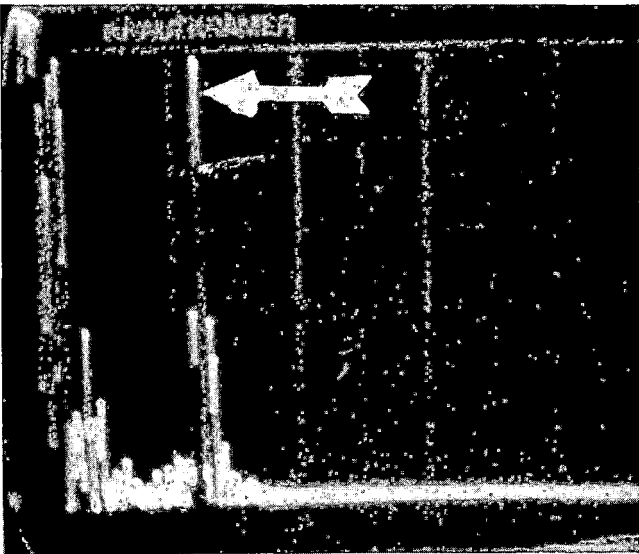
Ultrasonic Inspection Indication of 4 cm Crack Pattern
